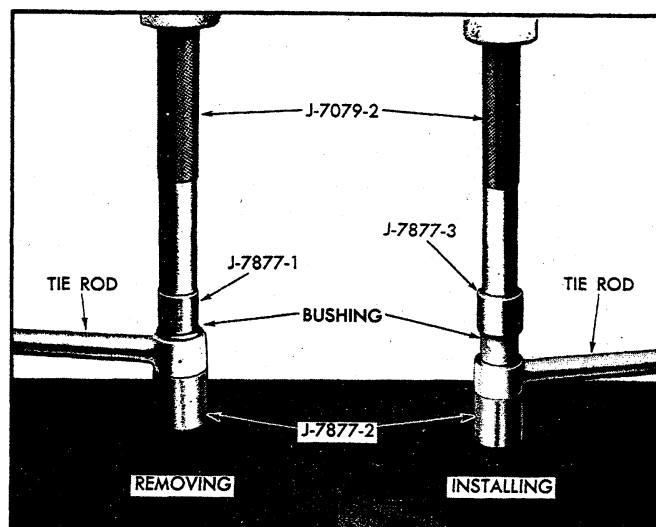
Tie Rod Bushing Replacement (Chevrolet)
